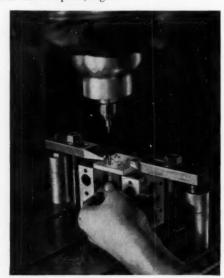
Workpiece is mounted high enough to permit measuring bottom as well as top of hole.
